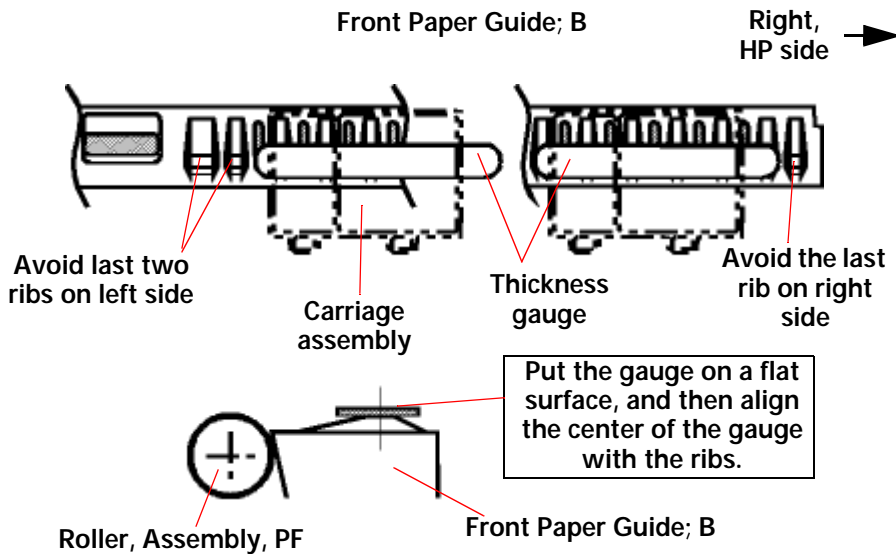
Setting the Parallelism-Adjustment Gauge
